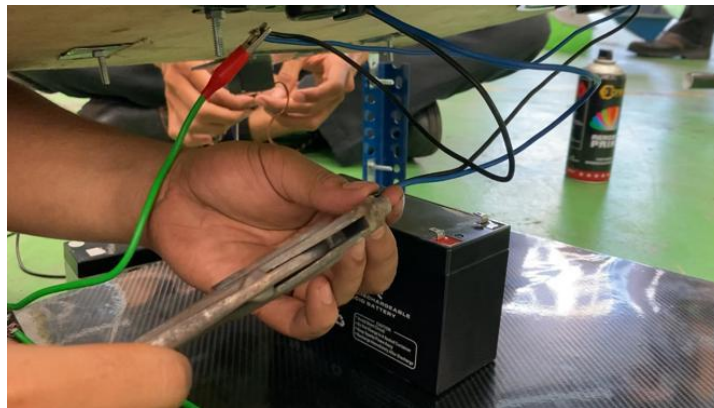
Put the battery on the base board and attach it using double tap, wire connection between all electrical components and motor is done.
